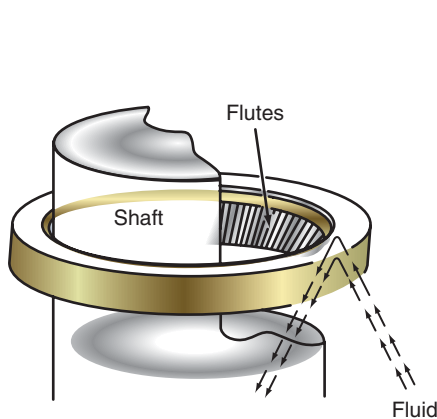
Fluted lip seal redirect oil back into the housing.
